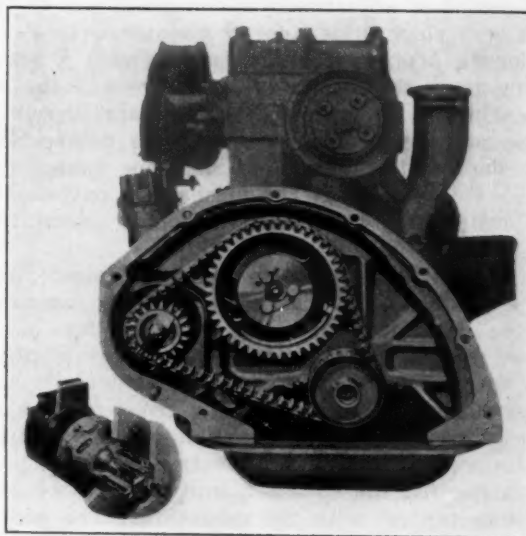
SPRING-DRIVE GENERATOR SPROCKET
